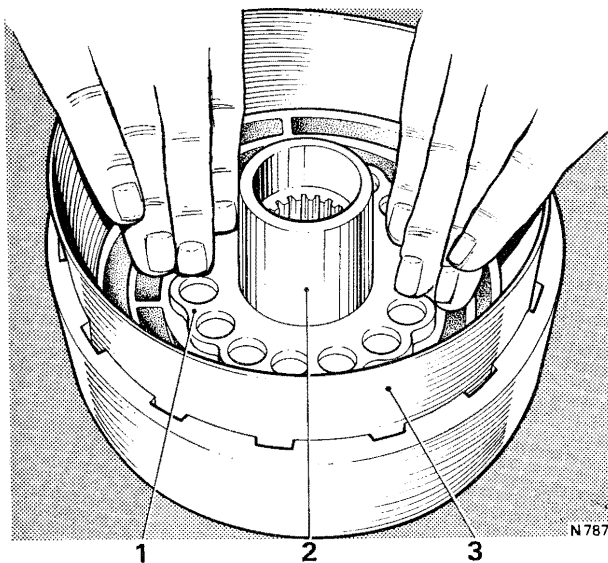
FITTING THE DIRECT CLUTCH PISTON
